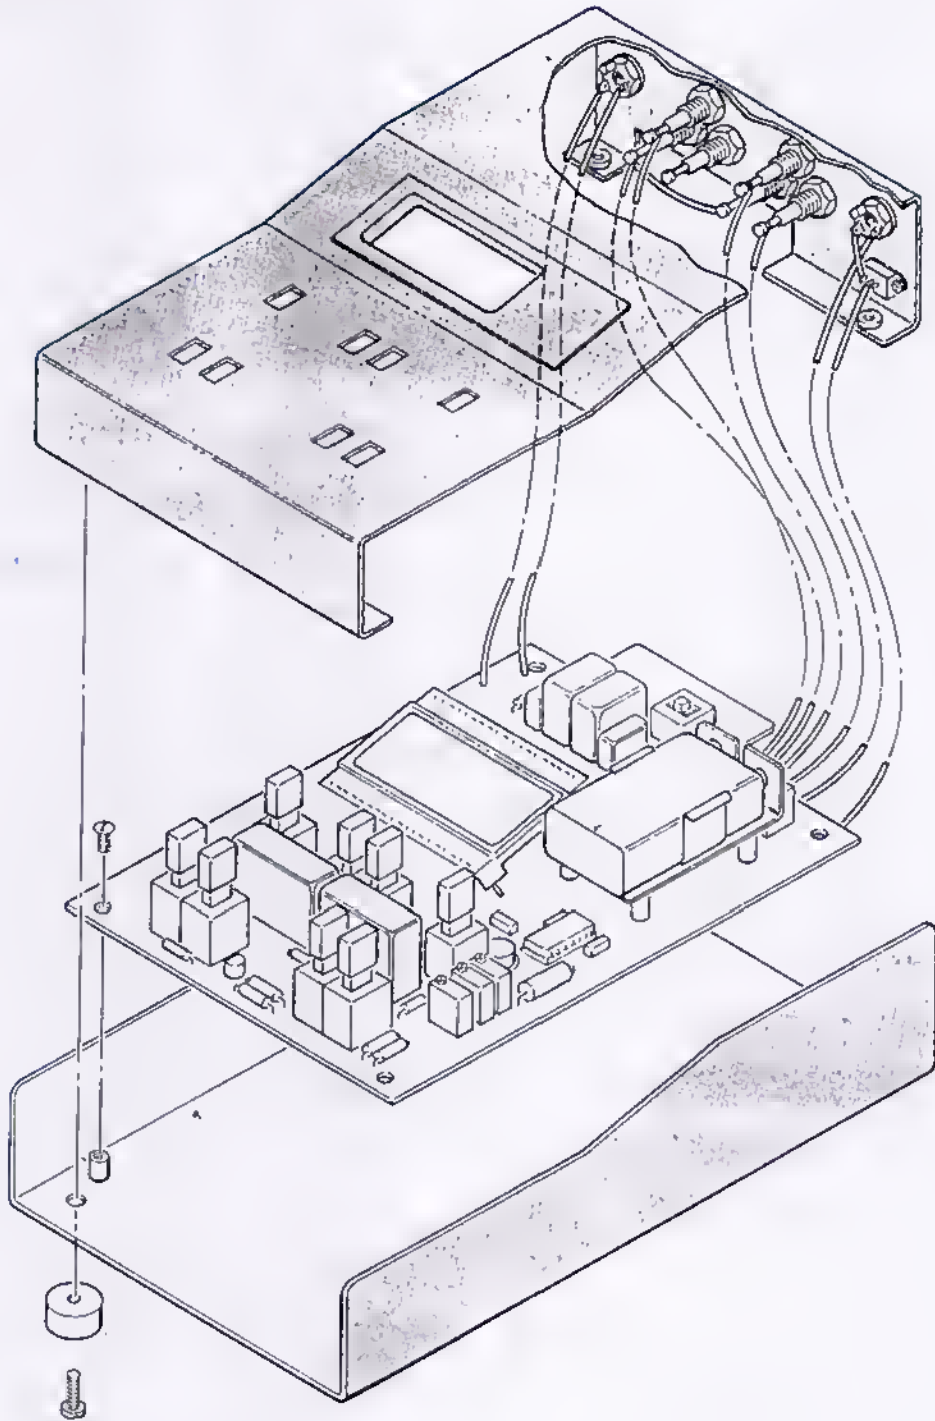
ASSEMBLY/DISASSEMBLY OF MODEL 44/88XL.
